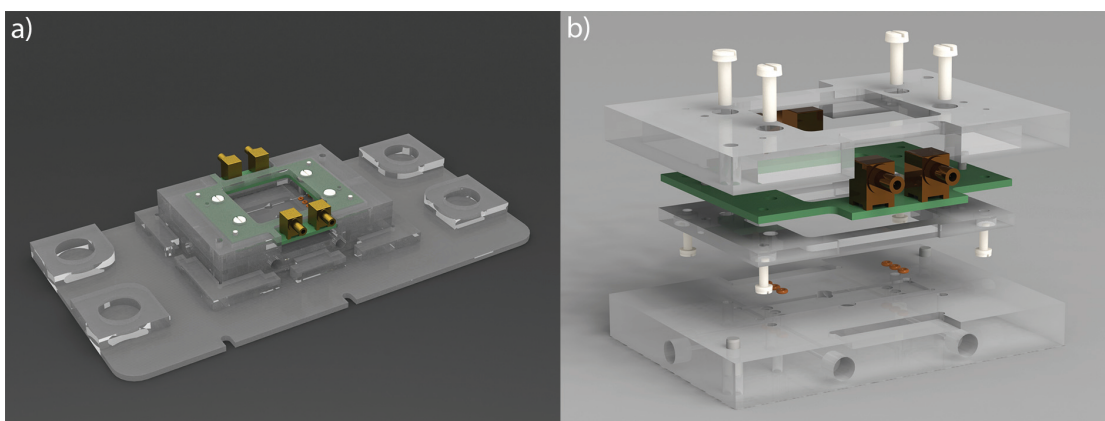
CAD Drawing of the chip holder with its different parts. a) A custom microscope plate fixes the chip holder under the microscope and provides additional fixation for valves. b) The chip holder is an assembly of different parts to fix the chip and provide electrical and fluidic access.
